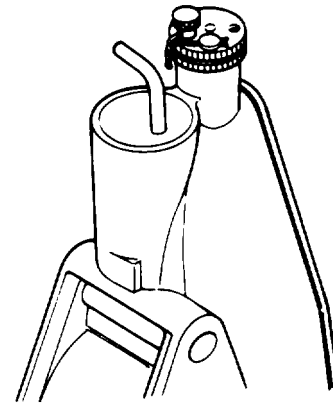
Holding Adjusting Handle Stopper from Turning
